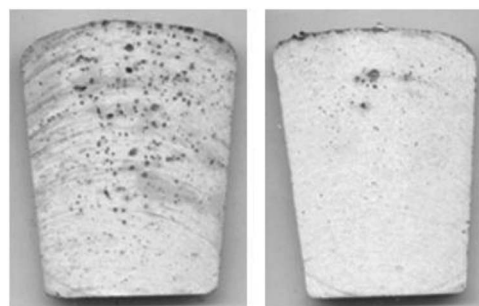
Cross section of RPT samples collected from wheel casting line (quiescent filling)
